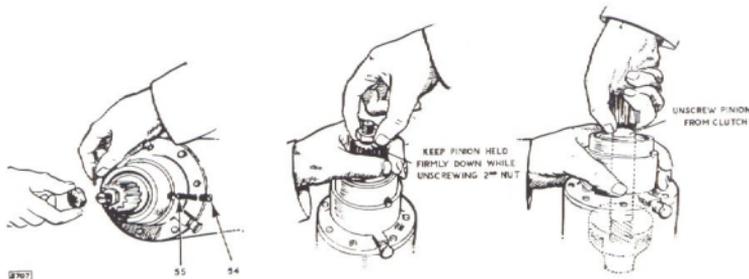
Method of changing starter motor driving pinion without dismantling unit.
